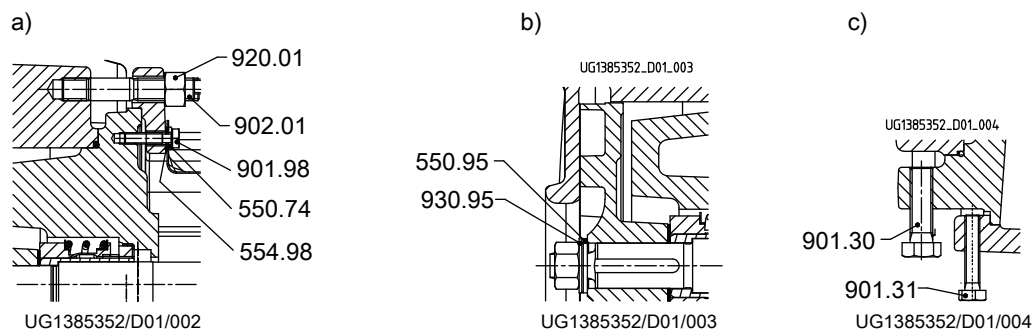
a) Clamped casing cover, b) impeller fastening elements for shaft unit 25, c) Position of forcing screws
